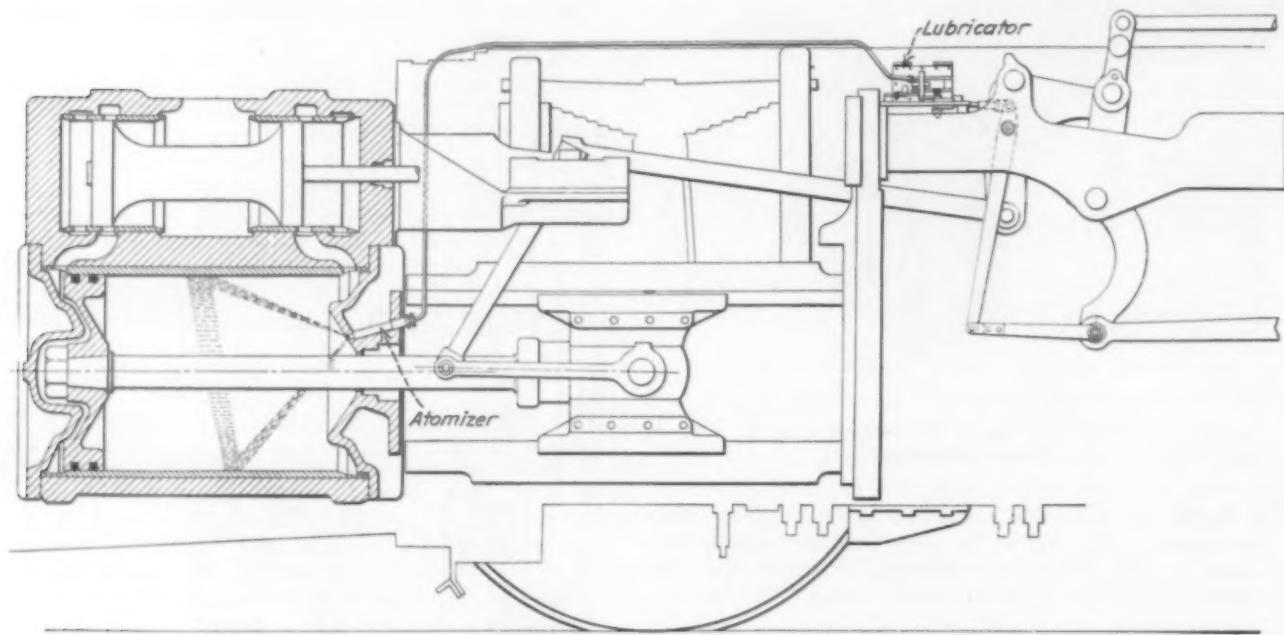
The Cross-sectional View of the Cylinder Shows How the Cone-shaped Oil Spray Strikes the Cylinder Wall and the Piston Rod
